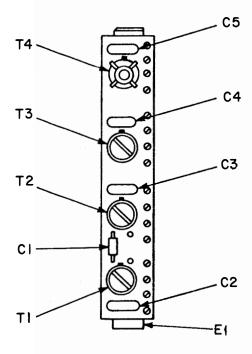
11 MHz Subassembly A2A4A29, Component Locations
